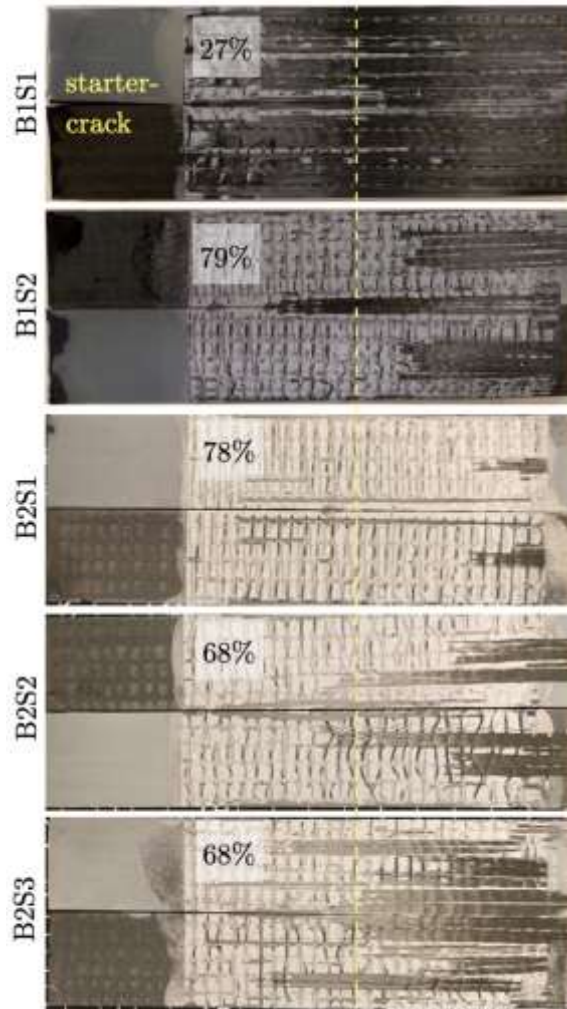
DCB sanding post-testing visual inspection of the fractured surfaces. Crack propagation occurring from right to left. The dashed line indicates the approximate location at which the tests were interrupted
